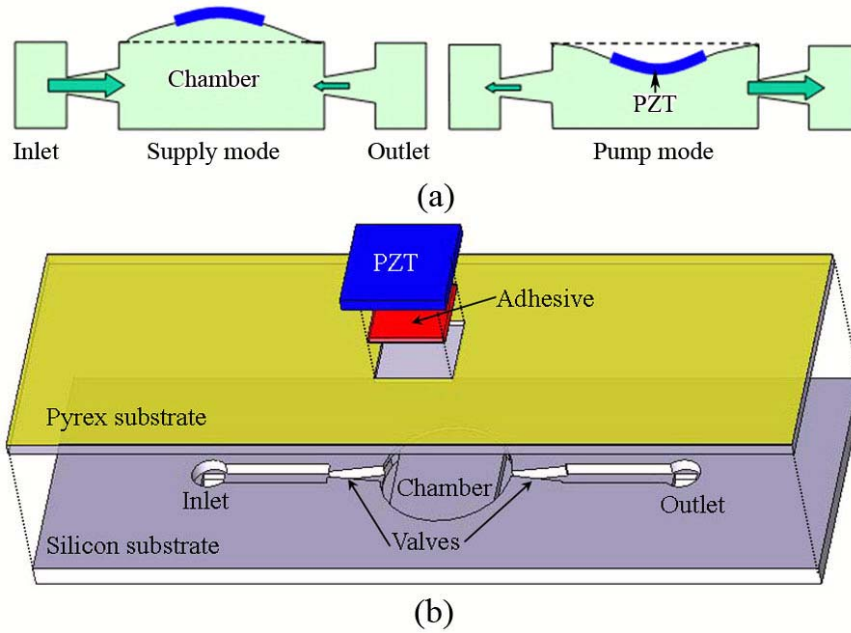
Schematic views of a diffuser valve micro pump: (a) supply and pump modes, net flow to the right; (b) an exploded view.
